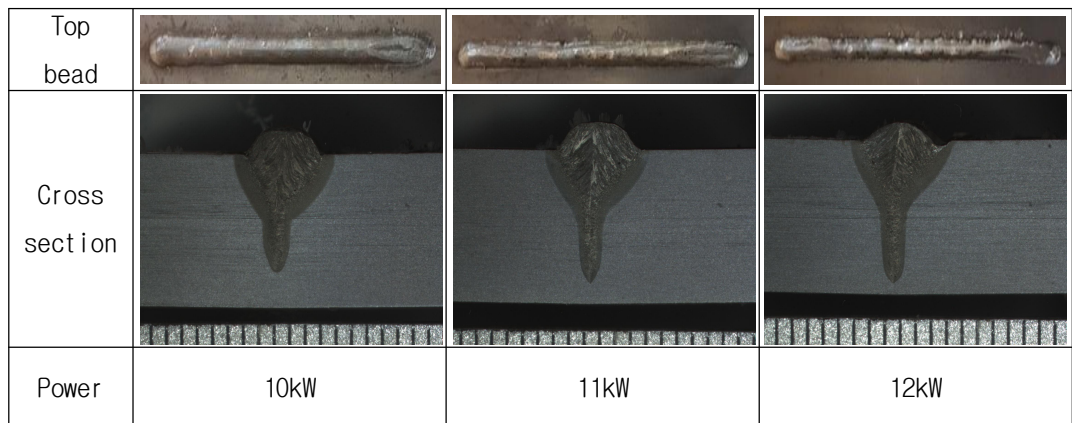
Effect of laser power on bead profiles in BOP welding
